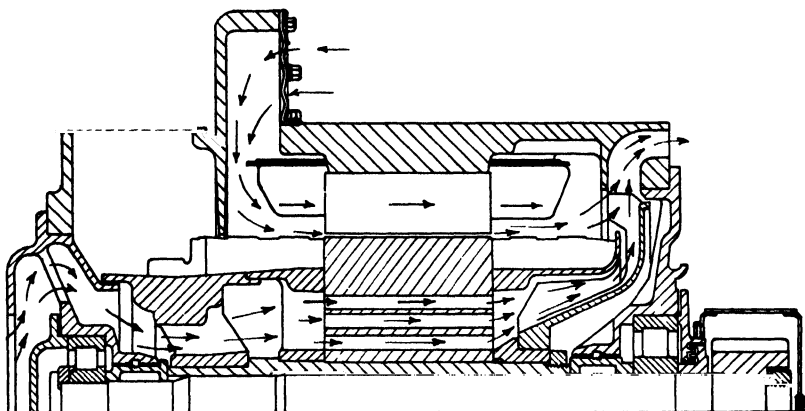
HALF-LONGITUDINAL SECTION OF RAILWAY MOTOR
